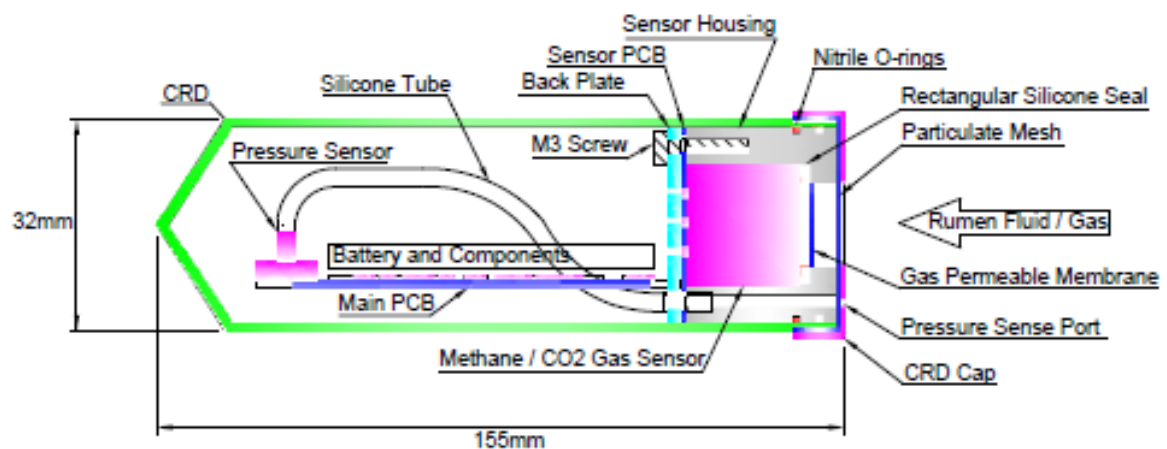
Detail parts of the new CH₄ and CO₂ IR gas sensor device assembly
